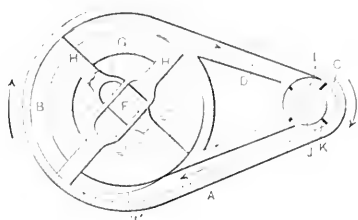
A Mowing Machine Drive, Patented by L. Lapyre, August 15, 1882, No. 262,794.
